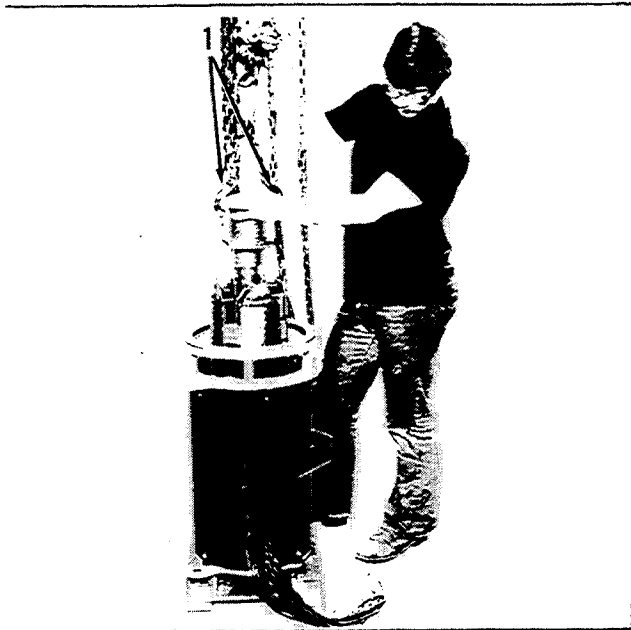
Generator Support/Drive Disc and Fan Removal
